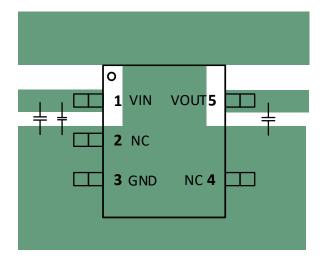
PCB Layout Example SCT71403FxxQ-TWBR
